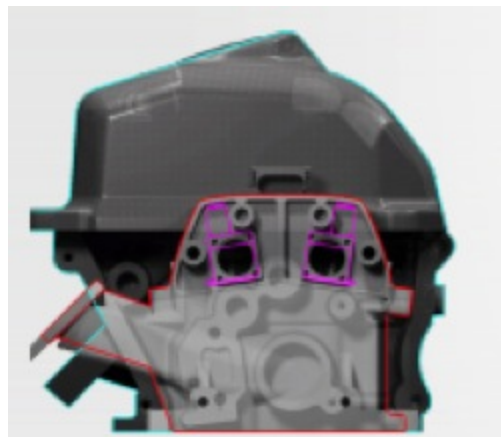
(Right): Image showing the 50% size reduction from regular engine to the camshaft engine which results in a 30% weight reduction. (*Free Valve*).
